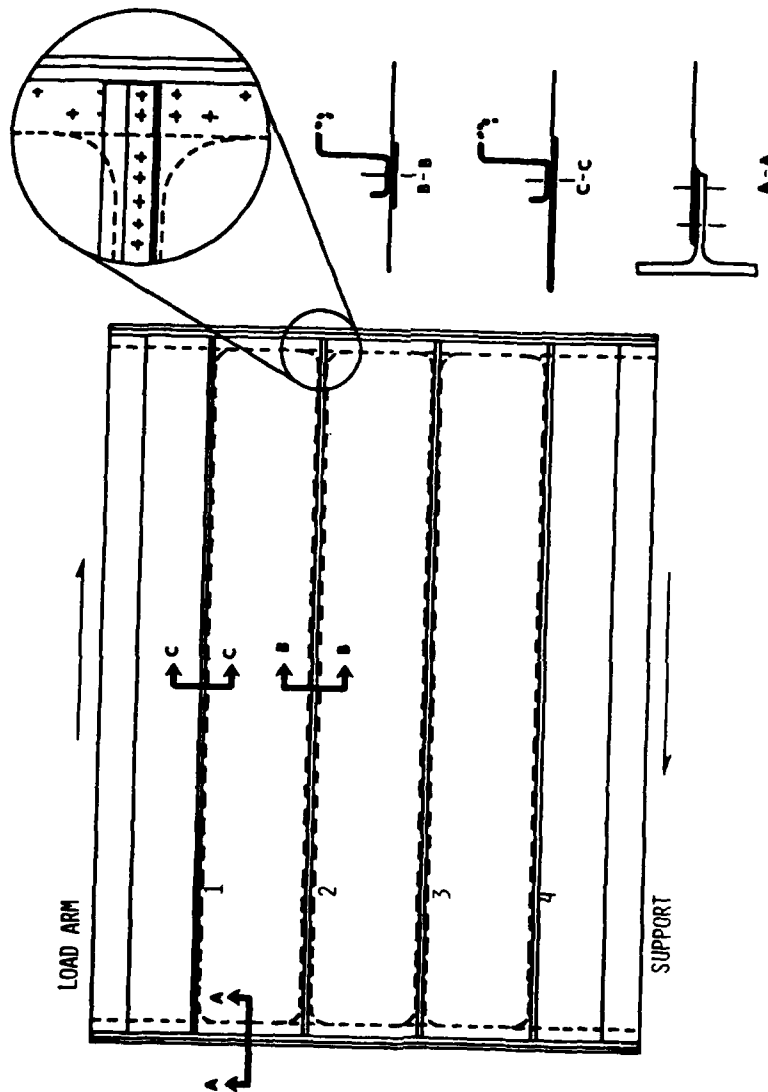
Flat Metal Shear Panel Fatigue Specimen (Reference 11).
